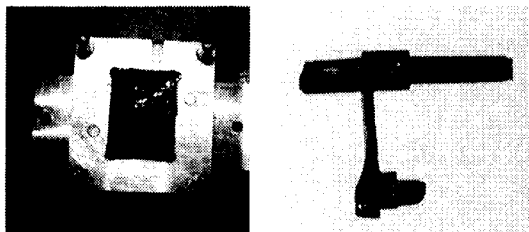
Semi-metallic soft mold and wax pattern of pistol part for investment casting
